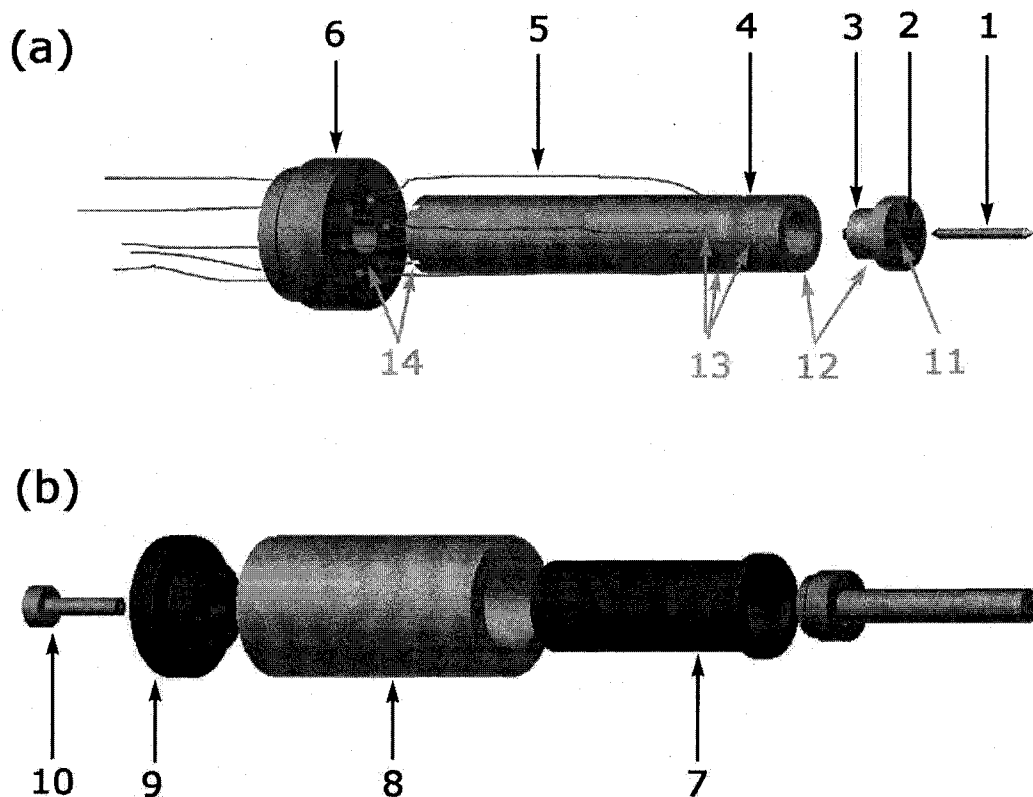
STM scanner construction – exploded view: (a) enlarged view of the scanner tube only and (b) scanner tube housing; (1) 0.25 mm diameter, double end etched STM tip, (2) St.-St. 316 hypodermic tube, (3) Macor hat washer, (4) four quadrant piezoceramic tube with inner electrode, (5) 0.15 mm diameter Kapton insulated oxygen free tempered copper wires, (6) St.-St. 316 scanner tube base, (7) St.-St. 316 sapphire tube sleeve, (8) sapphire tube, (9) St.-St. 316 scanner end cap, (10) vented screw; non conductive epoxy is used to glue the parts at junctions 11, 12, and 14 and the Cu wires are low temperature soldered on the Ni electrodes (13).
